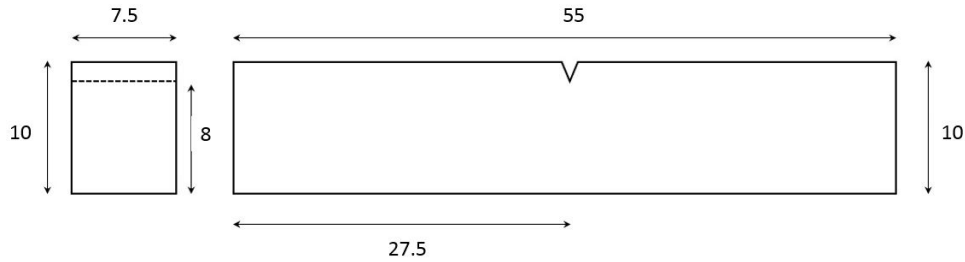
The dimensions of notch-impact specimens after precision machining given in millimeters.
